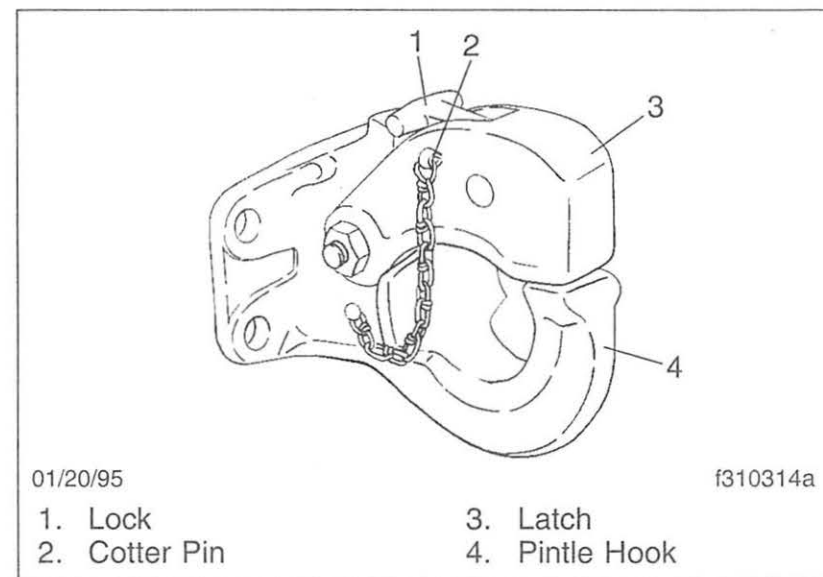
, Holland PH-T-60-AL Trailer Coupling
